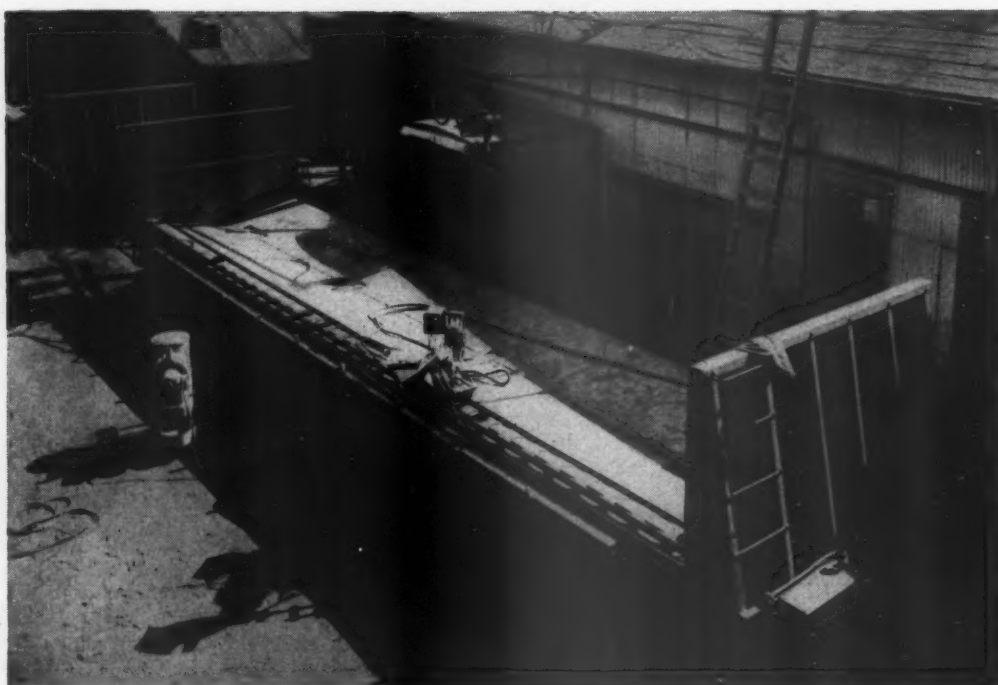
Unionmelt portable automatic equipment used in making welds at locations as shown in the diagram
